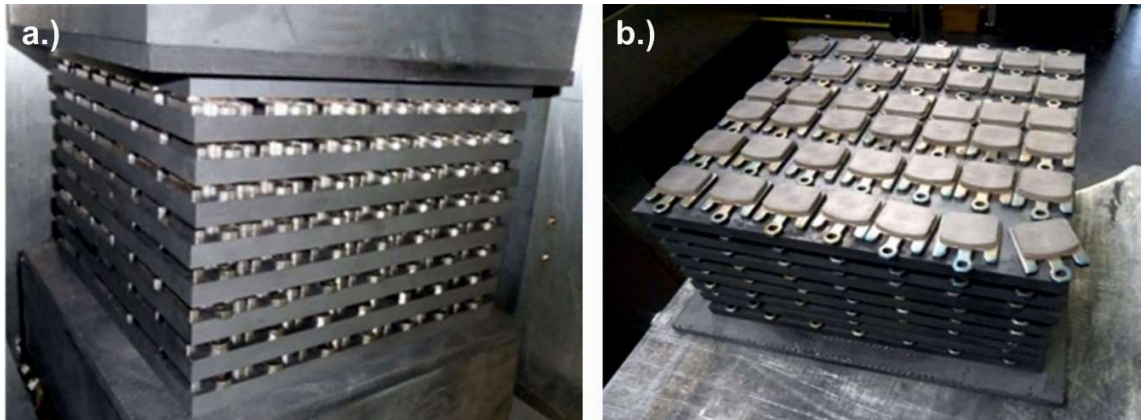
Stacking of mechanically stable semi-finished parts (break pads) without specific dies around a.) Side view b.) Top view (Courtesy of Dr. Fritsch GmbH) (18).
